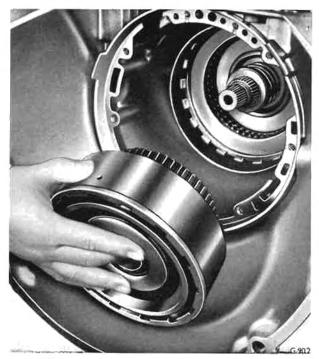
Removing the direct clutch and intermediate sprag assembly
